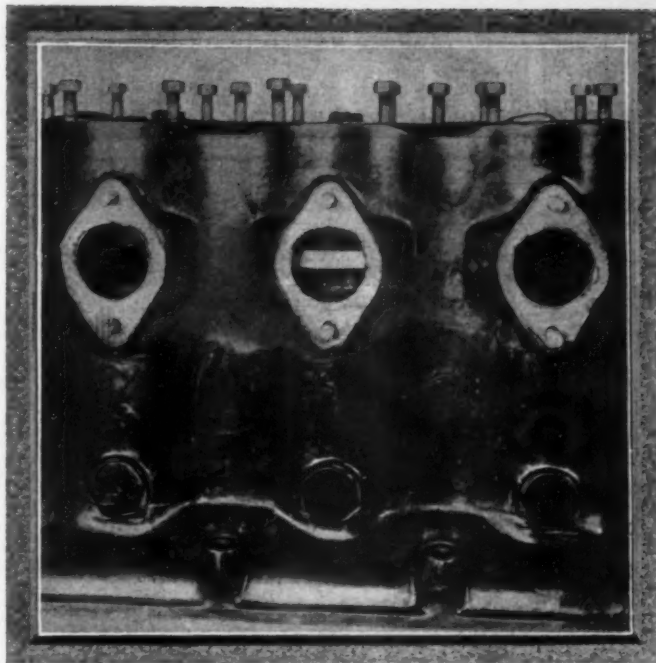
General appearance of the three-block cylinder, showing the intake ports with the manifold and cylinder heads removed
